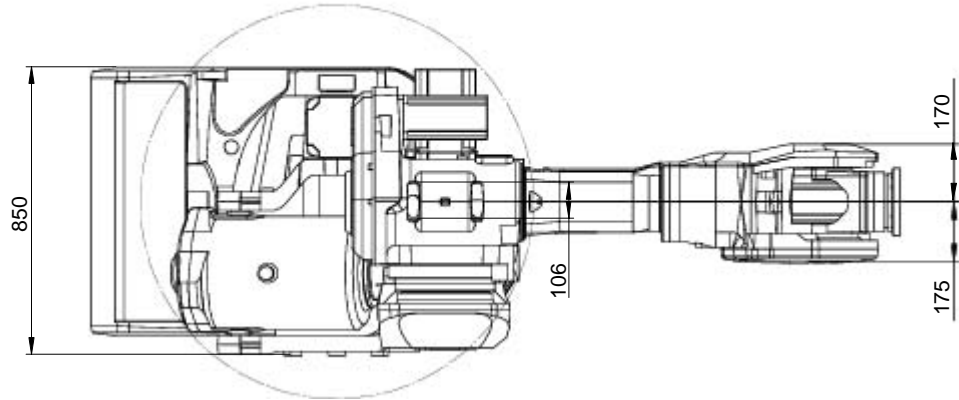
Holes for mounting of extra load on the upper arm on IRB 6600/6650 (dimensions in mm).
